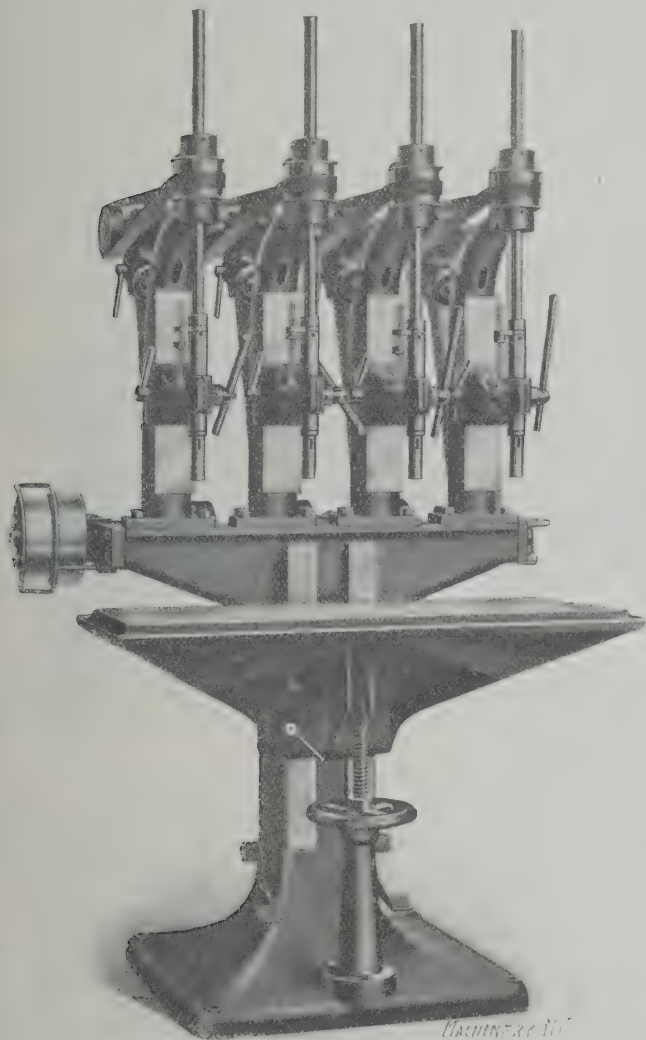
Sensitive Four-spindle Drill, built by W. H. Leland & Co., Worcester, Mass.
